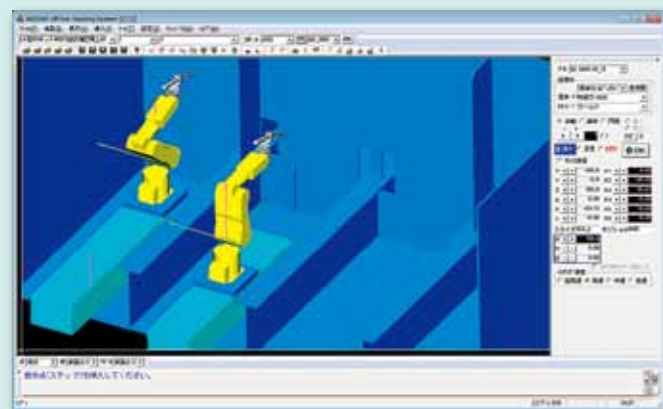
Weld connection between horizontal fillet-boxing welding and horizontal fillet welding
